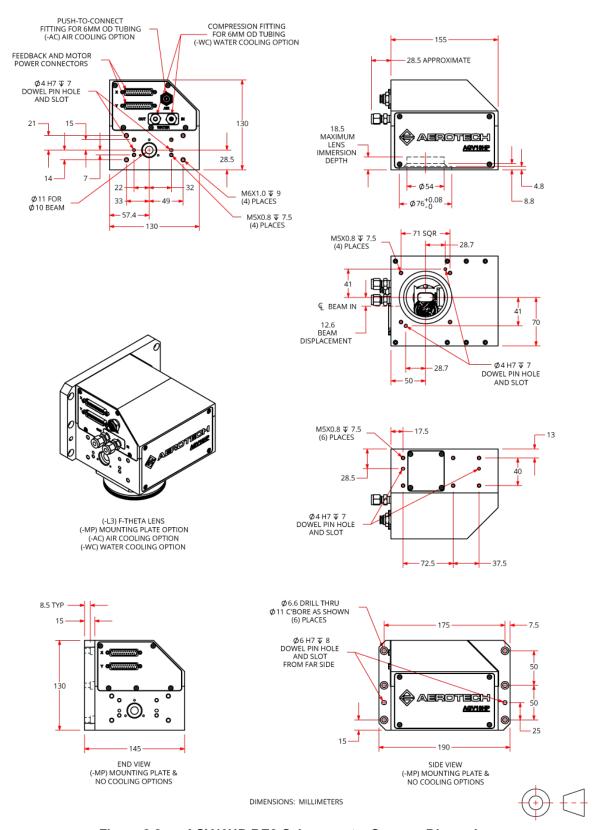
AGV10HP-BE2 Galvanometer Scanner Dimensions
